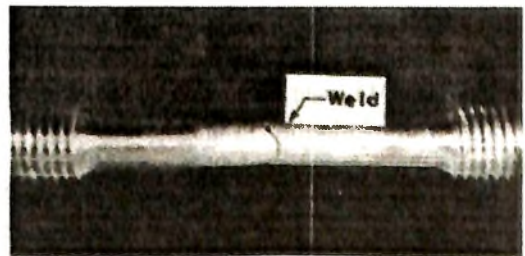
Typical photograph of the tensile specimen fractured from the weld zone.
